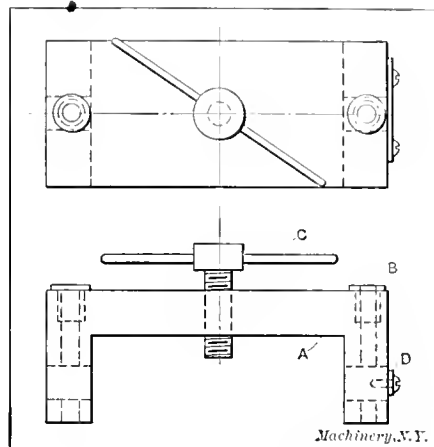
Simple Form of Jig for Drilling Two Holes in Shaft Ends
